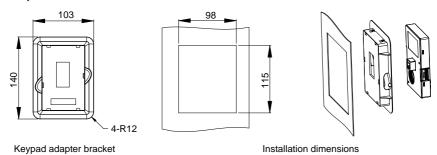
Keypad mounting bracket (optional) for 380V 0011-0500kW models
